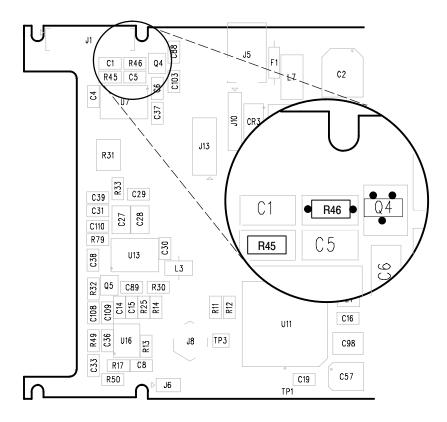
Partial Main circuit board (TSG601) showing location of changed parts
